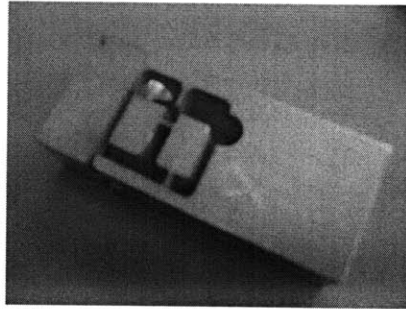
In-plane clamp failed in waterjet step because of misalignment
